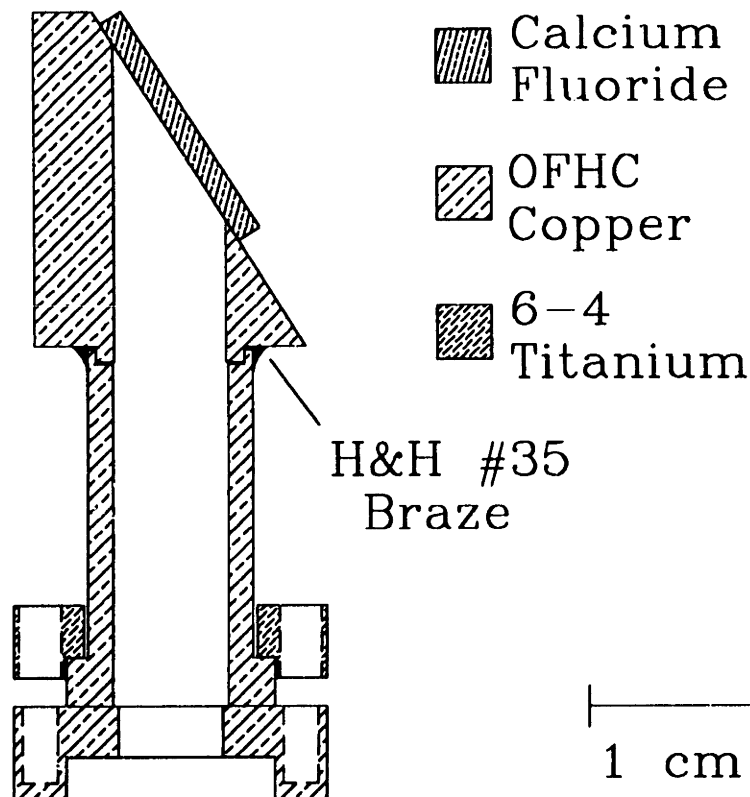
Upper Brewster window assembly (Handy & Harmon[66] braze designation is shown).
